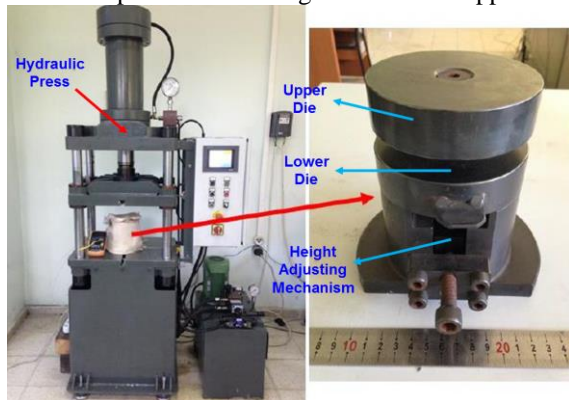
Hydraulic press and die set used in sample manufacturing.
